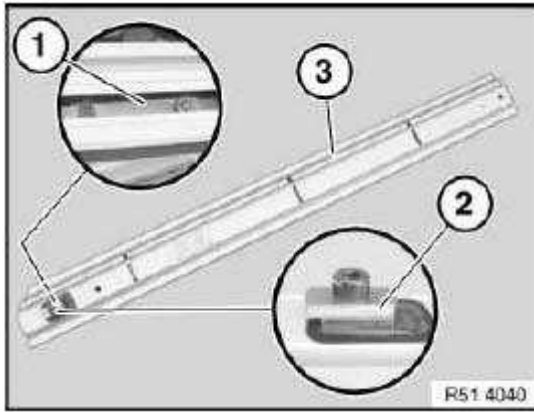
Reinforcement Plate, Guide And Lashing Rail
